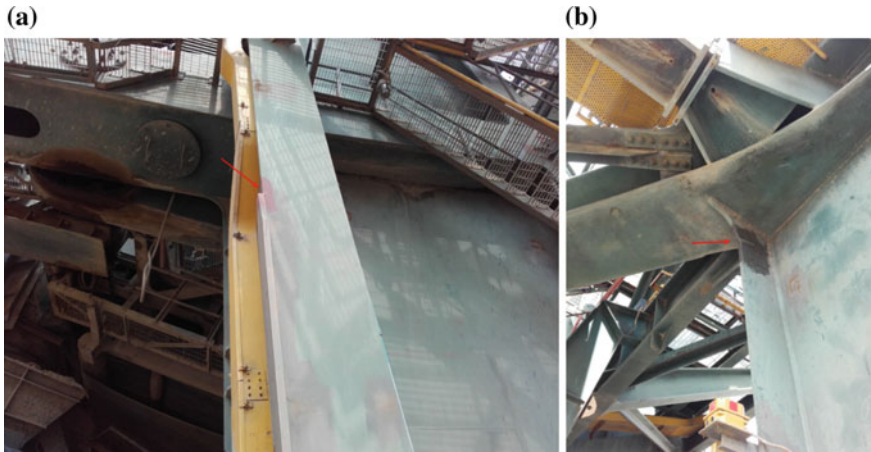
Examples of damage to pylons of surface mining machines: a damage to the vertical pillar of the pylon; b fracture in the structural joint
